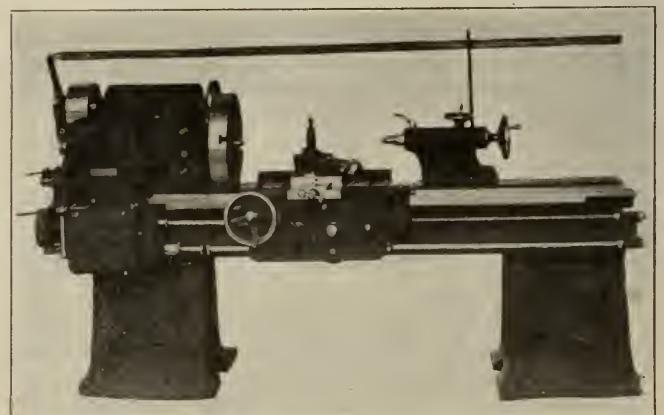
Single-Speed Pulley, Gear Driven Lathe.
